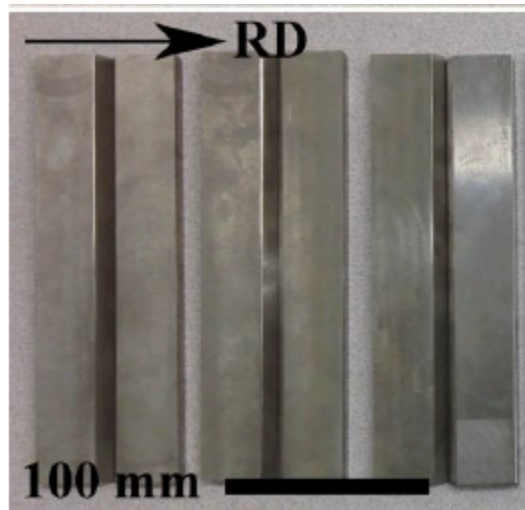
Cut bars of Zircaloy-4 for welding trials. The rolling direction (RD) of the original plate is indicated.
